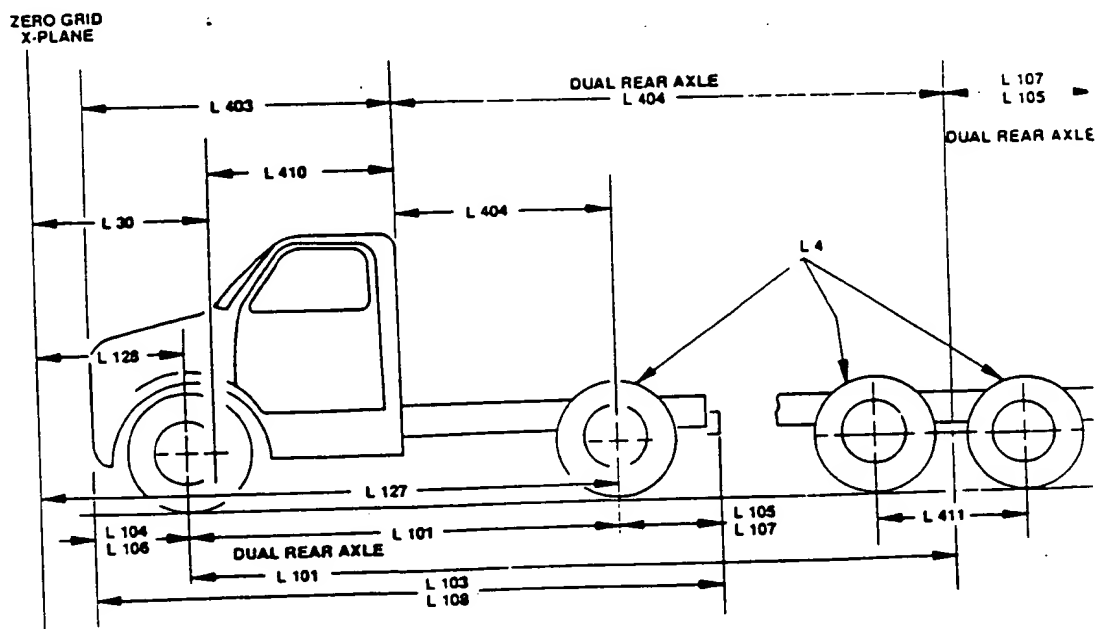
TRUCK EXTERIOR DIMENSIONS, LENGTH
